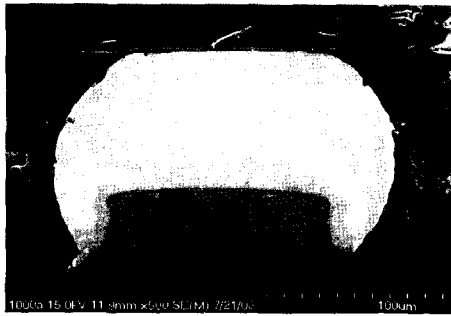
Cross section of Flip Chip solder bump after 1000 cycles
